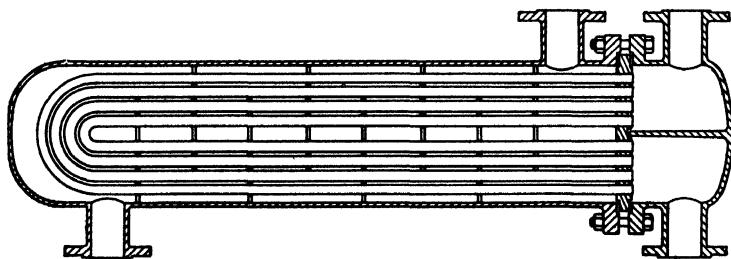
Cross section of a shell-and-tube heat exchanger with U tubes.
